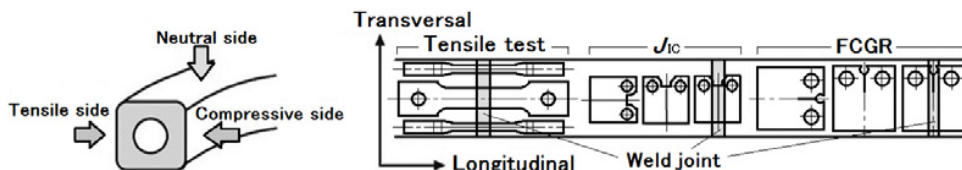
Major example of the specimen location removed from the jackets section and weld joint.
